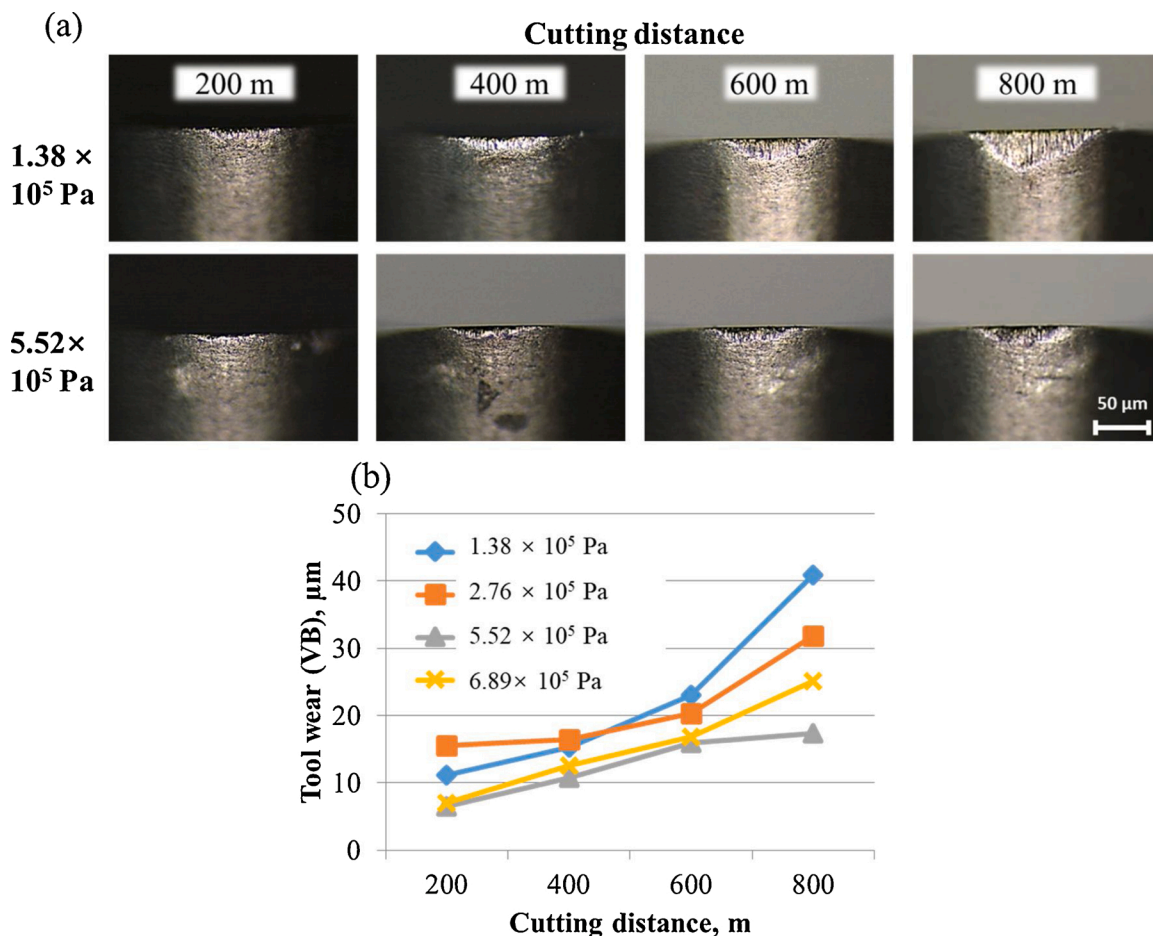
(a) Microscopic images of PCD tool flank faces after different cutting distances, and (b) measured tool flank wear for different air blowing pressure and cutting distances when the nozzle is at the near position.
